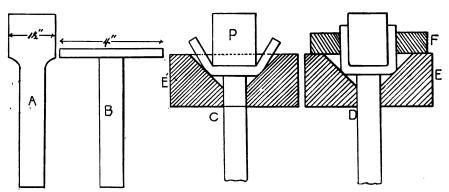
SHOWING ANOTHER METHOD OF FORGING SOCKET WRENCHES
